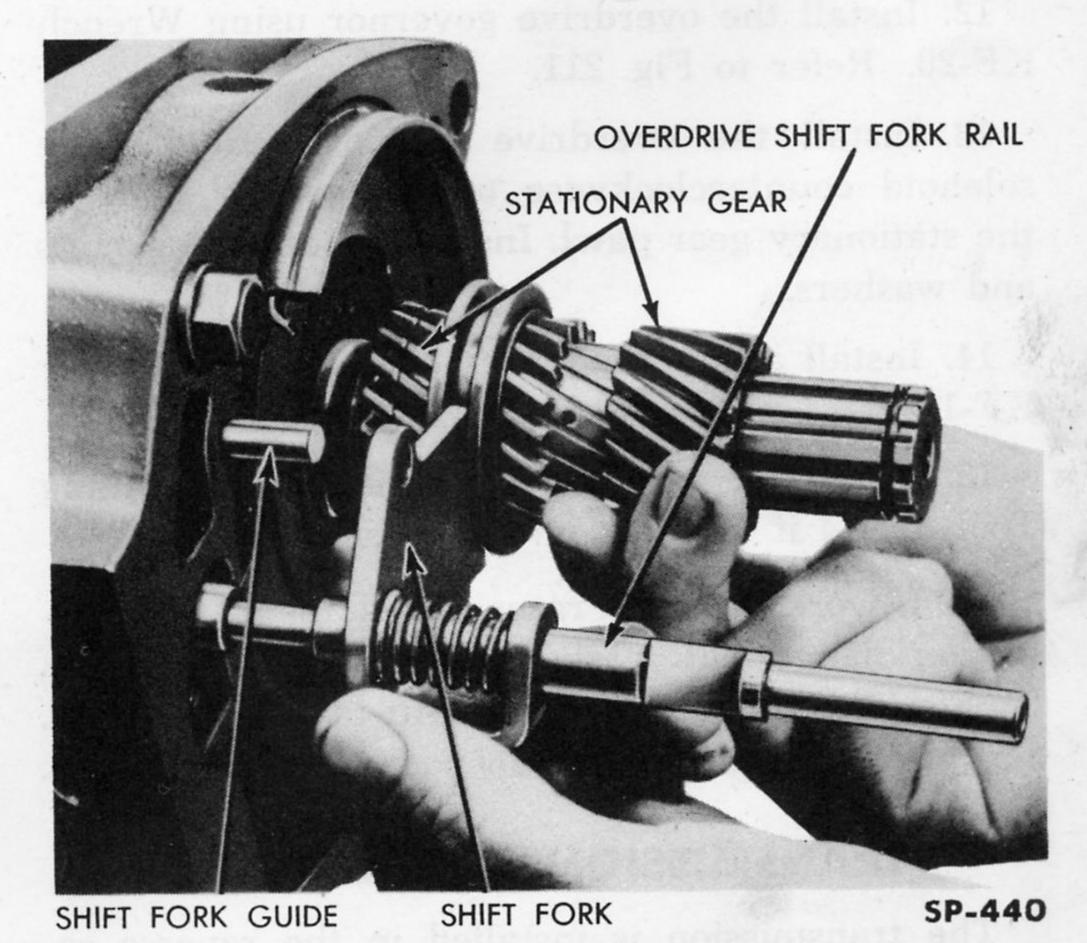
Installing Stationary Gear and Shift Fork Rail Assembly
